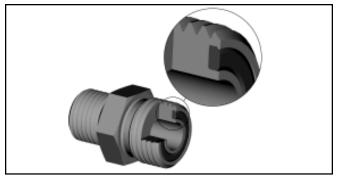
Captive O-ring Groove (CORG) Cutaway
